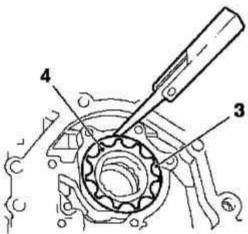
Checking the oil pump: 1 - cover oil pump, 2 - mounting screws, 3 - external rotor, 4 - inner rotor
